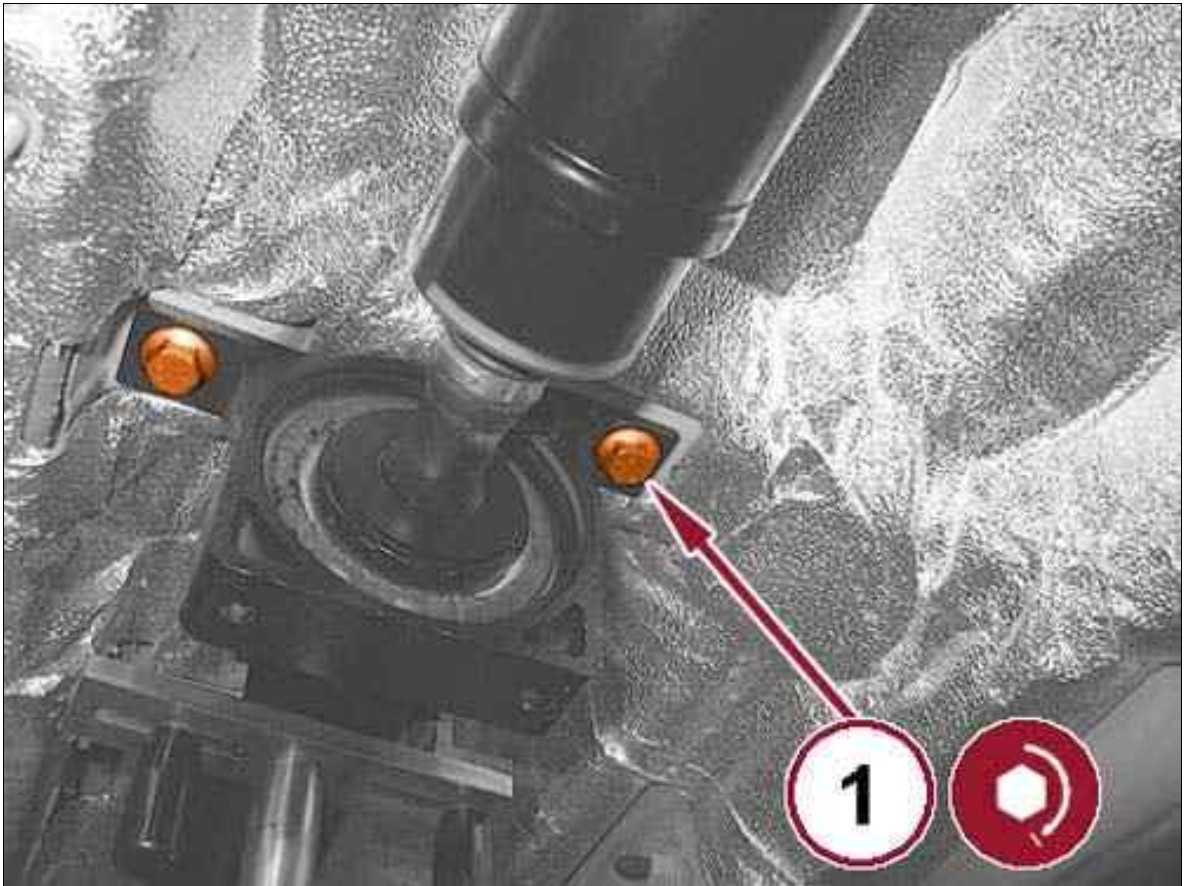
Propeller Shaft Snap Ring & Dust Cover
